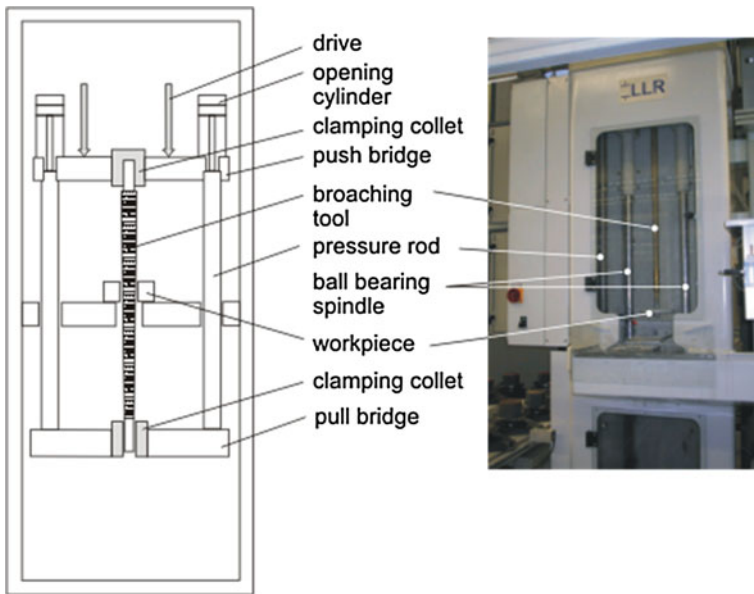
Pull-push internal broaching machine (type LLR, Balve)
